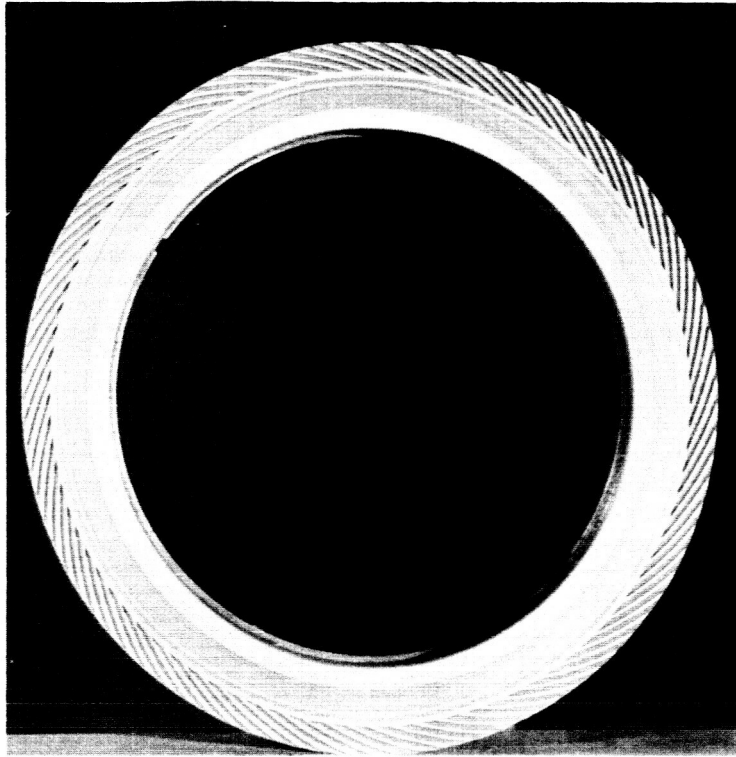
Seal Seat After 31.5 Hours of Testing With Axial Seal Seat Runout (XPN-33380)
